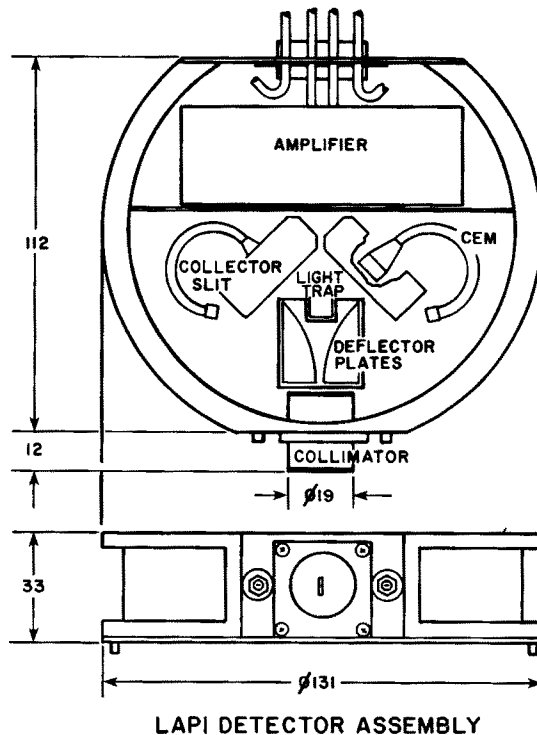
Schematic drawing of the LAPI detector assembly. Dimensions are given in millimeters. \varnothing indicates diameter.
